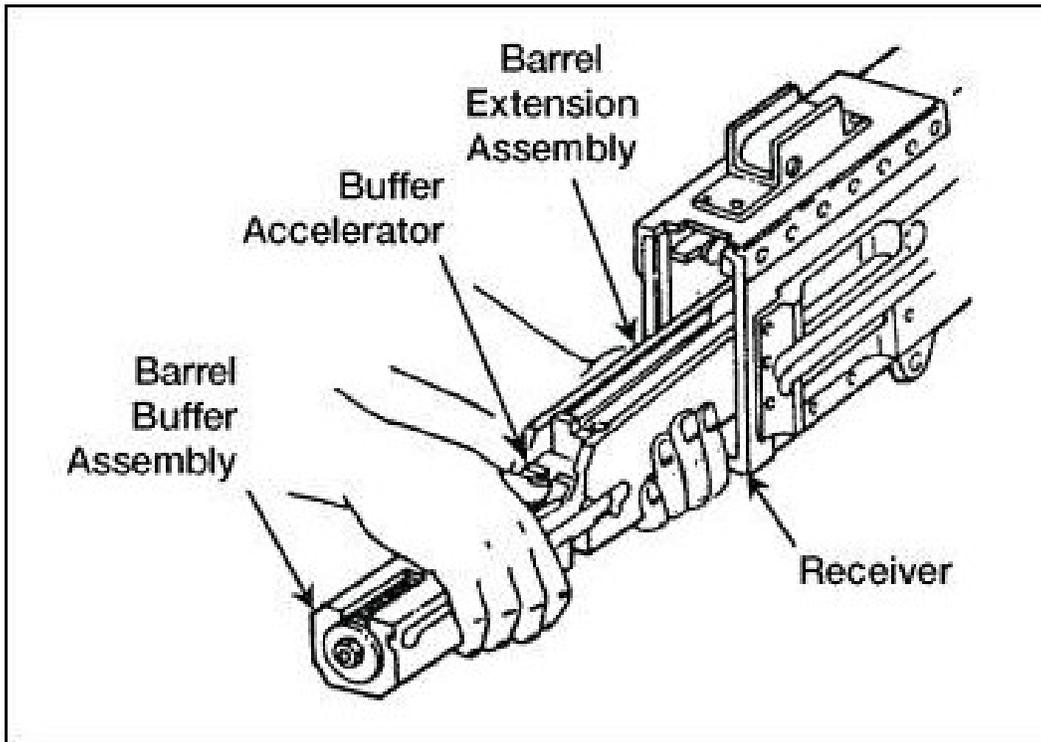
ST-1025_29 (Installation of the barrel buffer and barrel extension assemblies)
